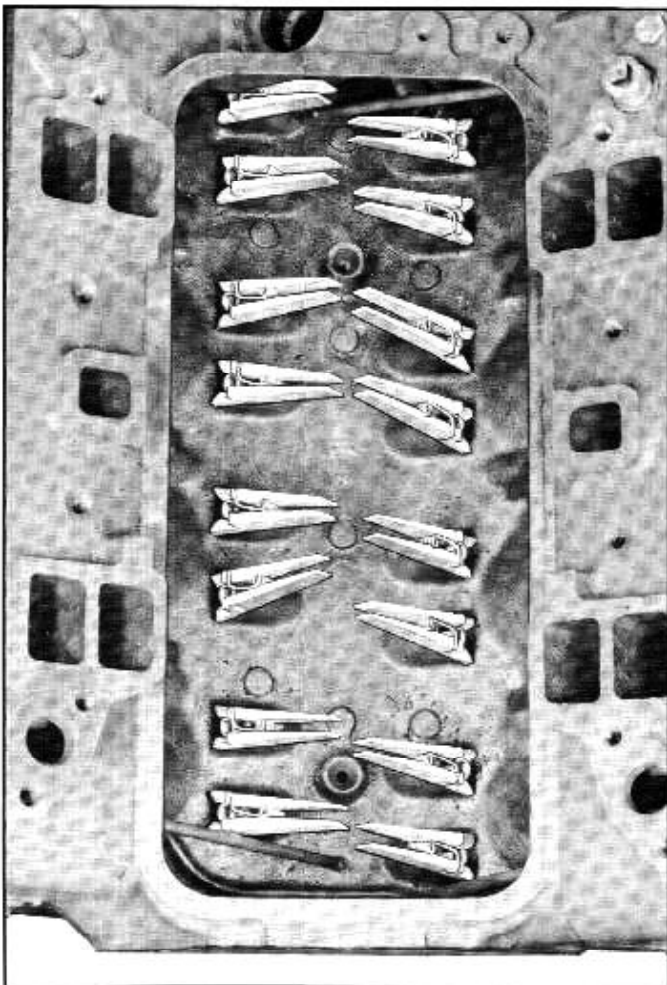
A-26—Retaining Valve Tappets with Clothes Pins
